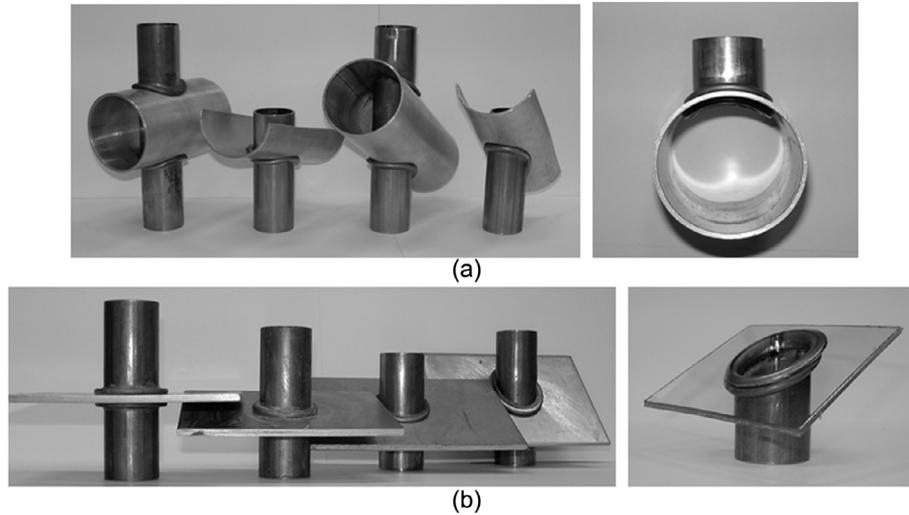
Application of the new proposed technology for (a) connecting full-size and half-sectioned tubes and for (b) fixing tubes to sheets (metallic and polymeric) at different inclination angles.
